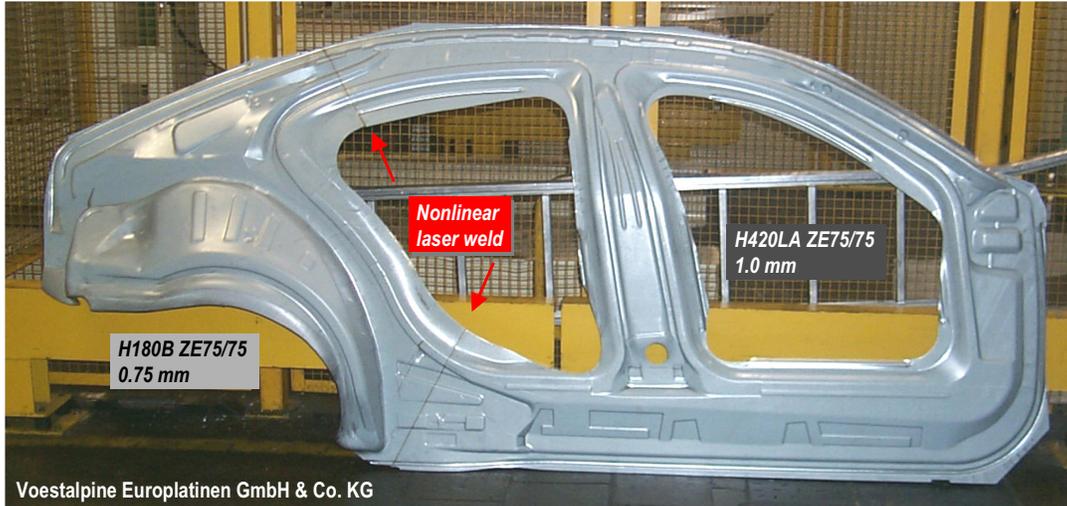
Example of an integrated body side inner panel of the BMW E65 (7-series) using a non-linear laser welded blank consisting of BH steel (YS: 180 MPa) and microalloyed high strength steel (YS: 420 MPa). Blanks are stamped as two per hit (LH & RH side) on a 9,500 t transfer press.
